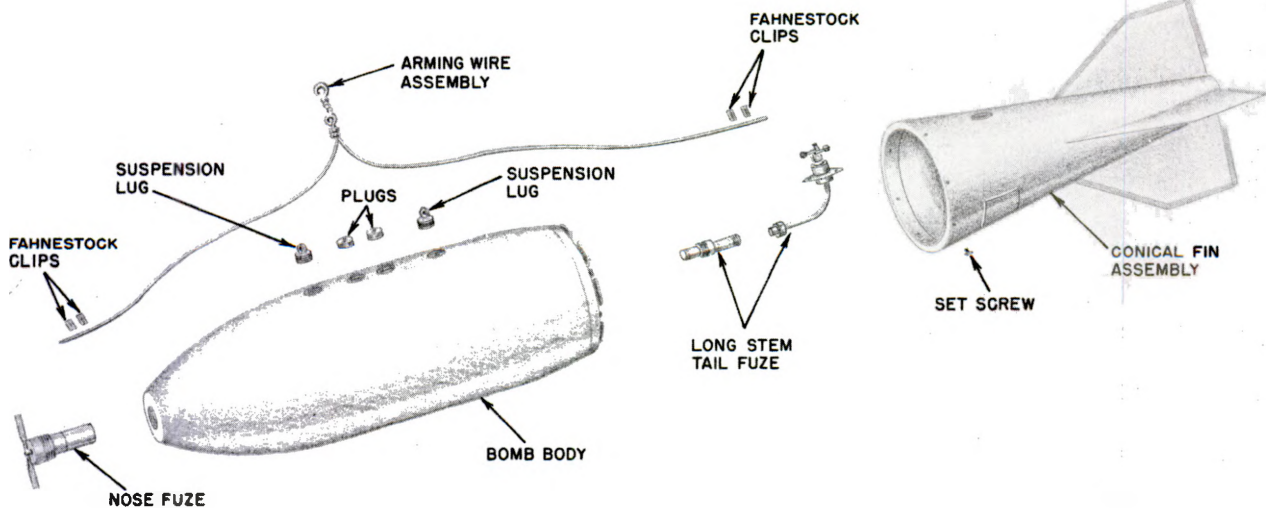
Demolition bomb (mechanically fuzed), exploded view.
